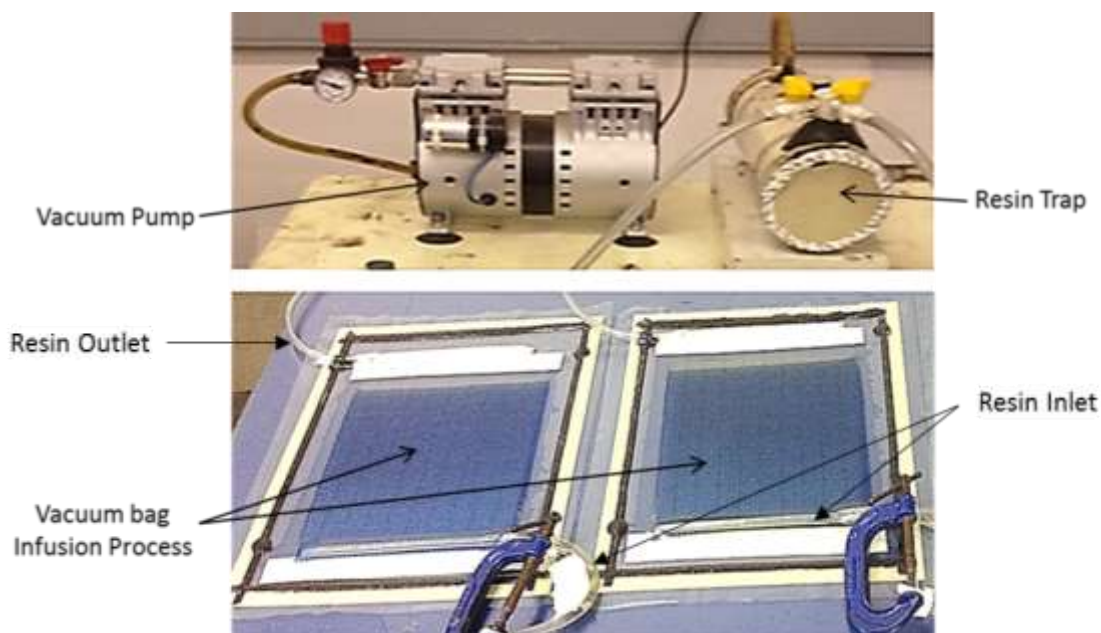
Setup of vacuum assisted resin infusion moulding (VARIM) process
